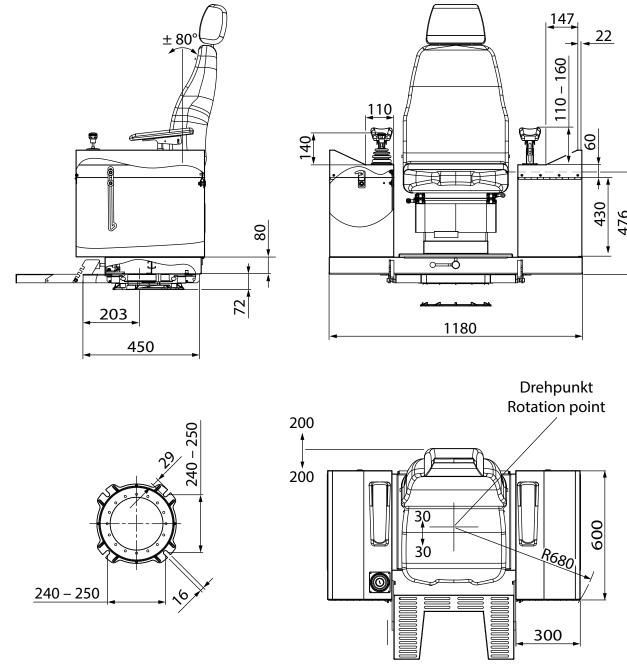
Control stand SV1C Basic-Line: Dimension drawing 3 (dimensions in mm)
